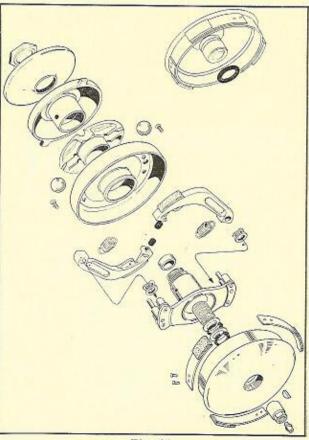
Exploded view of the RM9 automatic clutch and variable gear unit
